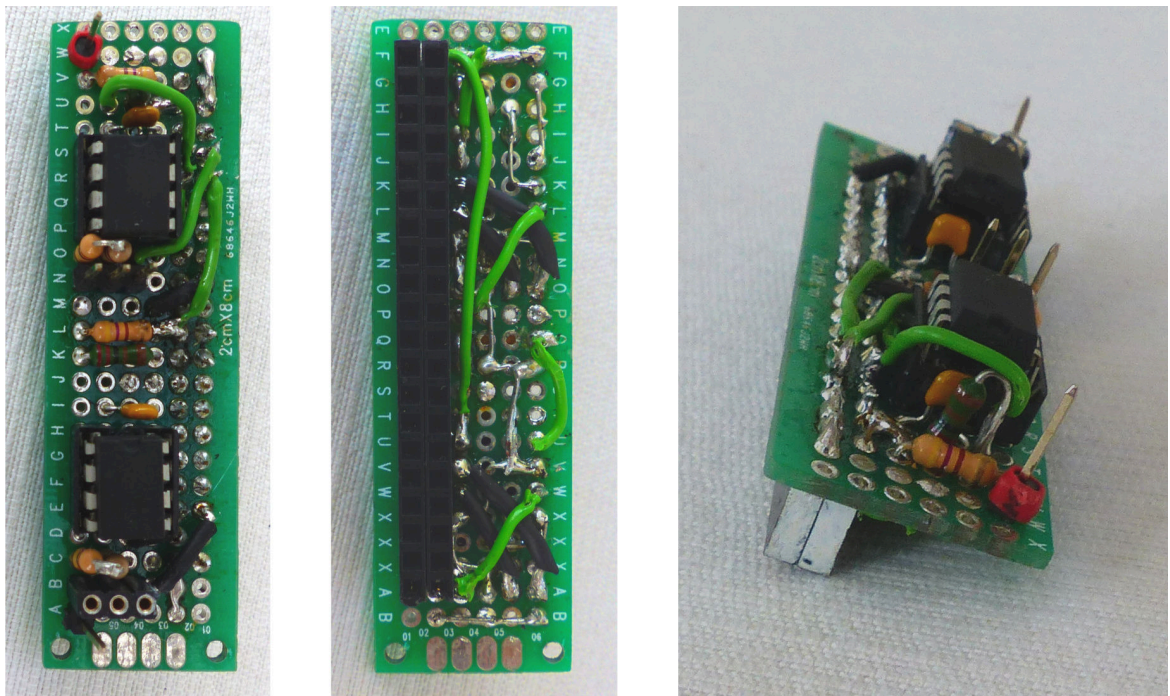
The finished extension board. Top view, bottom view, side view.
